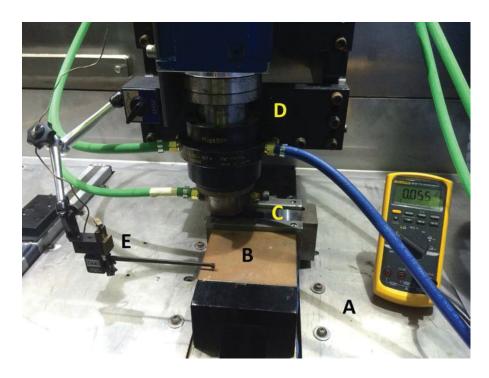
FSW Experimental Setup with Extensometer: A. FSW Machine Table, B. FSW Clamp, C. FSW Specimens (Run-on Tab, Coupon, Run-off Tab), D. FSW Head Assembly, E. Extensometer
